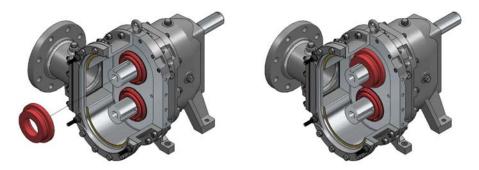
Use of the Seal Alignment tool to fully position the seal assemblies
